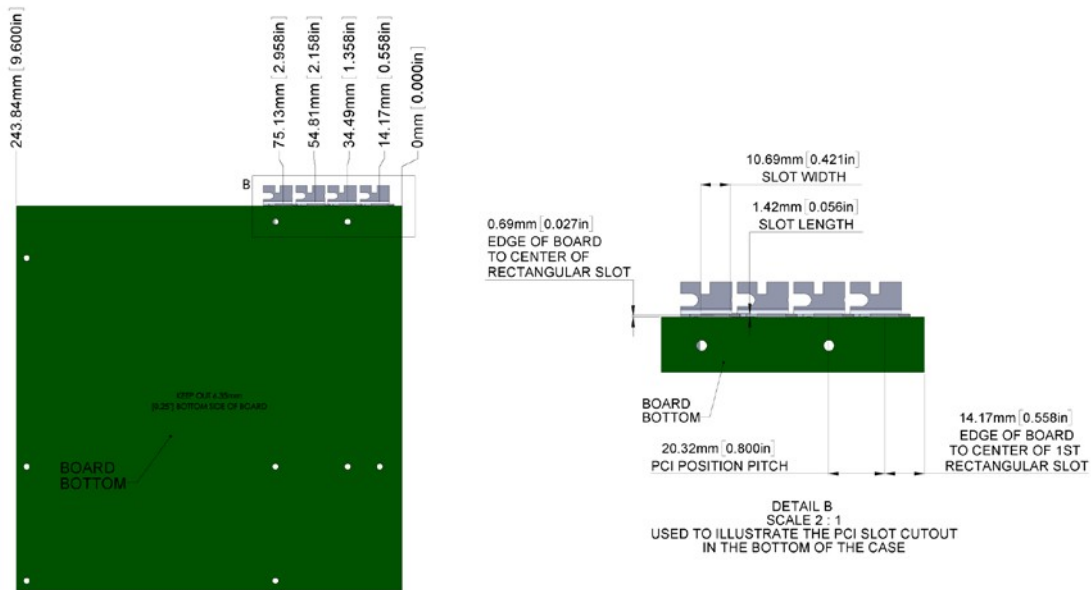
Micro ATX board bottom view, with dimensions for rectangular slot for PCI tab.
